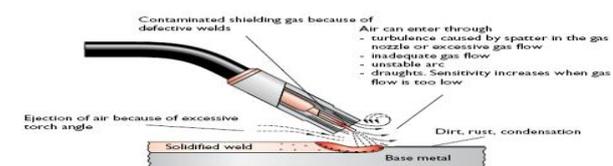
How the shielding gas atmosphere and weld pool can be contaminated during gas metal arc welding
